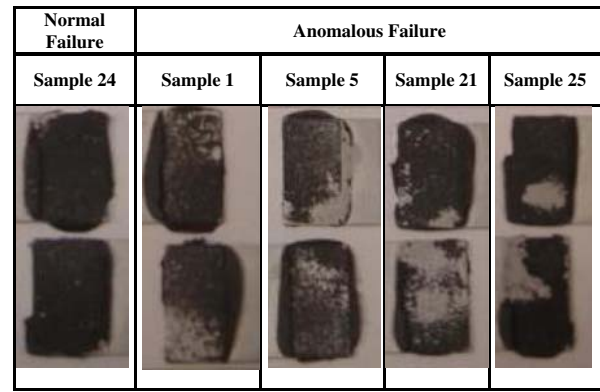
Post-test fracture surfaces: Sample 24 is the sample identified in Table 5 as EBX-24. Samples 1, 5, 21, and 25 are the starred samples in Table 4 and all exhibited low fracture shear stresses
